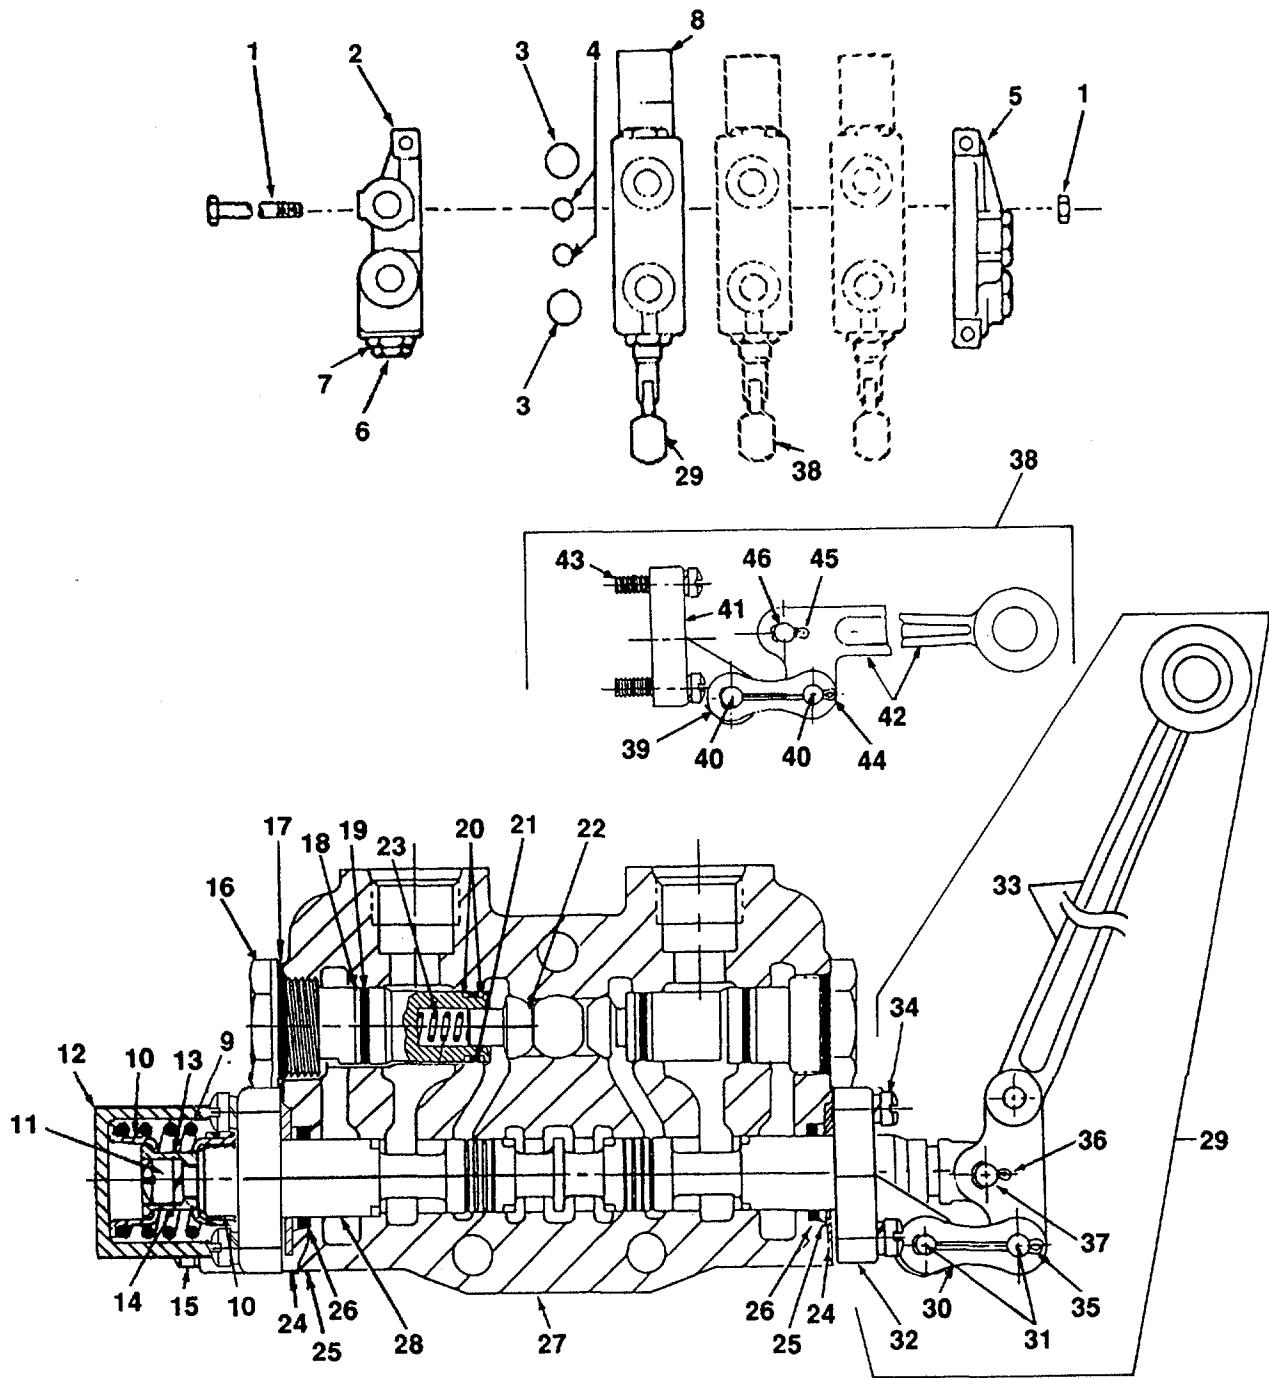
Outrigger and Ladder Directional Control Valve Assemblies
